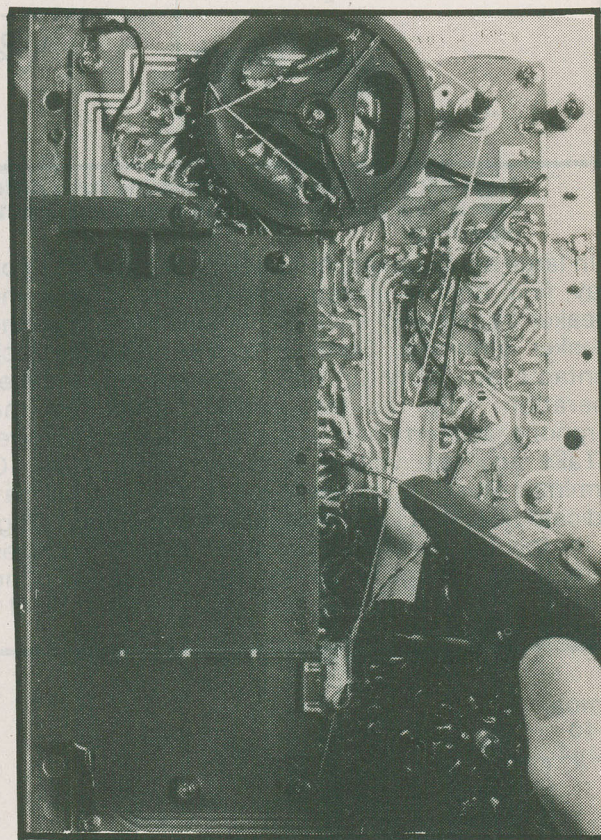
When working with a soldering iron inside the set, protect the dial cord and plastic parts with masking tape and pieces of cardboard. Watch out for the dial cord. A slight touch with a hot iron can cause you lots of grief!
